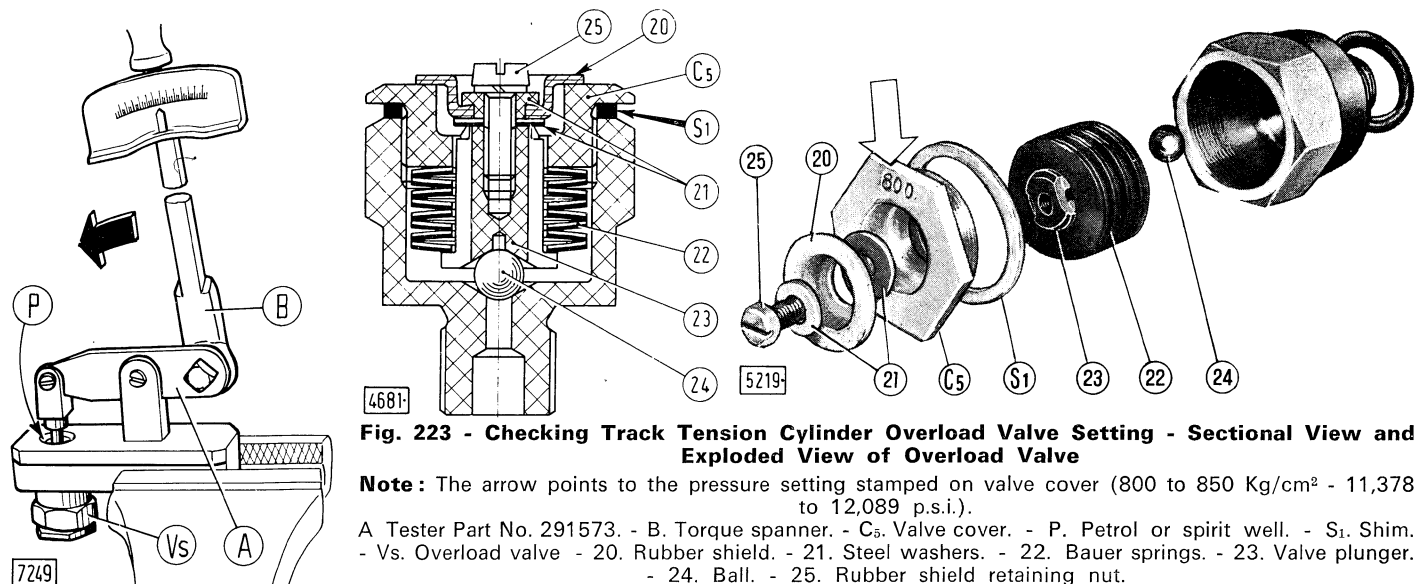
Checking Track Tension Cylinder Overload Valve Setting - Sectional View and Exploded View of Overload Valve
